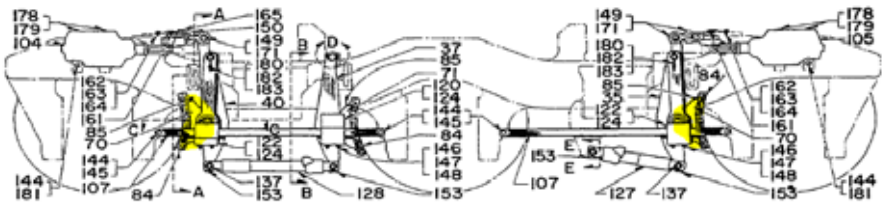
SD Flexicoil and/or HTC Single Shoe, Live Lever Brake Head Assembly locations (steel ferrule with thermoplastic bushing):
